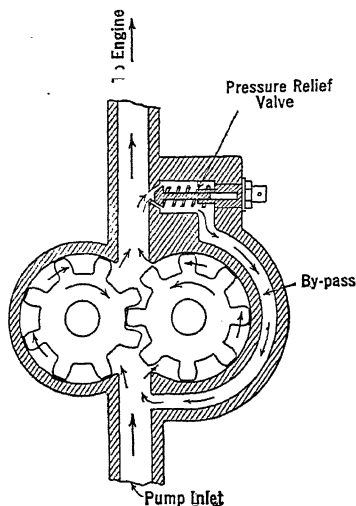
Diagram of a gear-type oil pump with relief valve.
